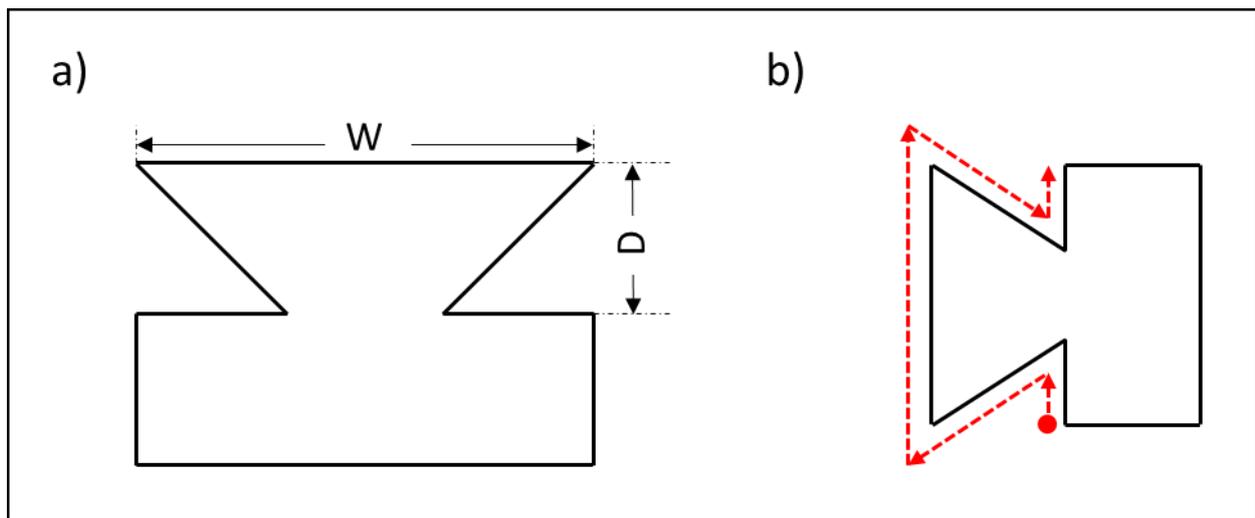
Dovetail profile with variable dimensions and b) Cutting path for the wire
